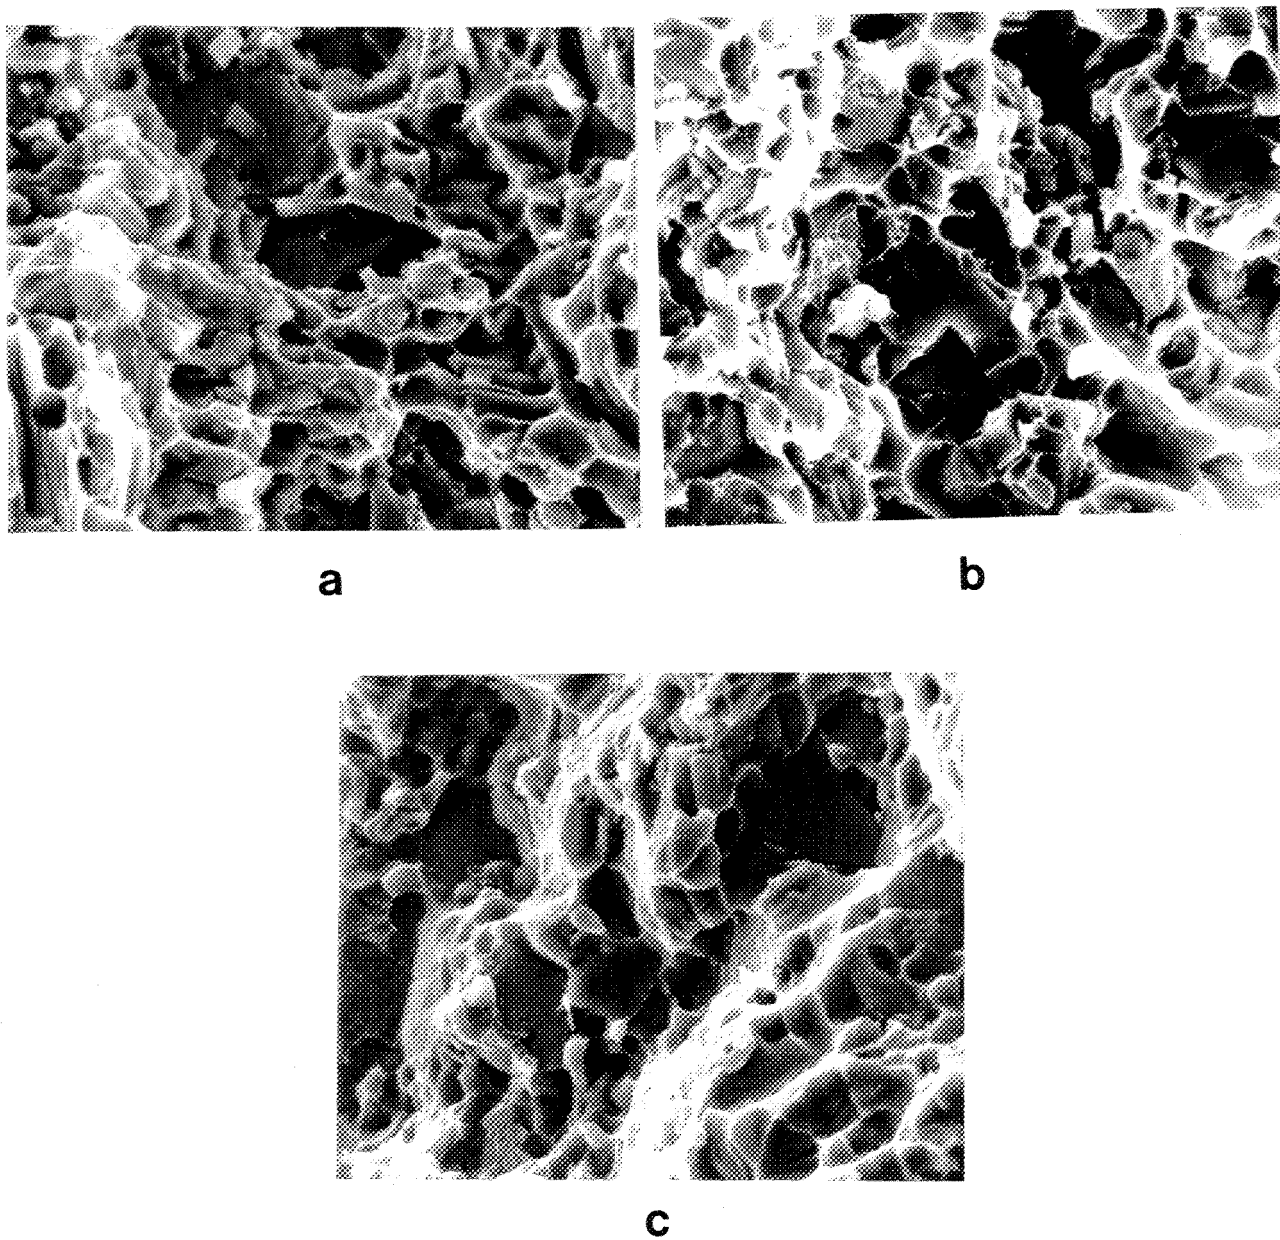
Fractographs showing the fracture mode of F3A.10S: (a) 5 hr aging at 160°C, (b) 12 hr aging at 160°C, (c) 24 hr aging at 160°C (1000 X).
